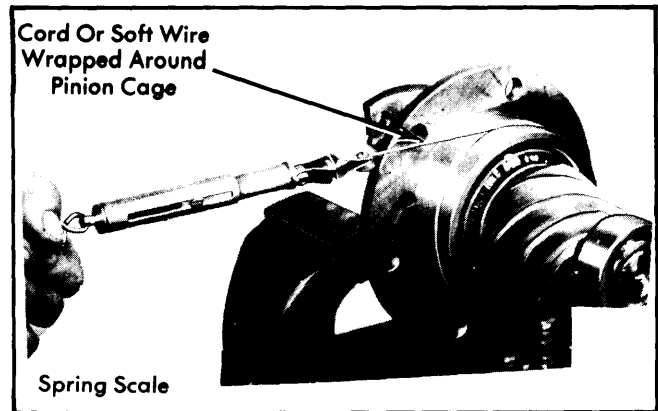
Using Spring Scale to Measure Pinion Bearing Preload
